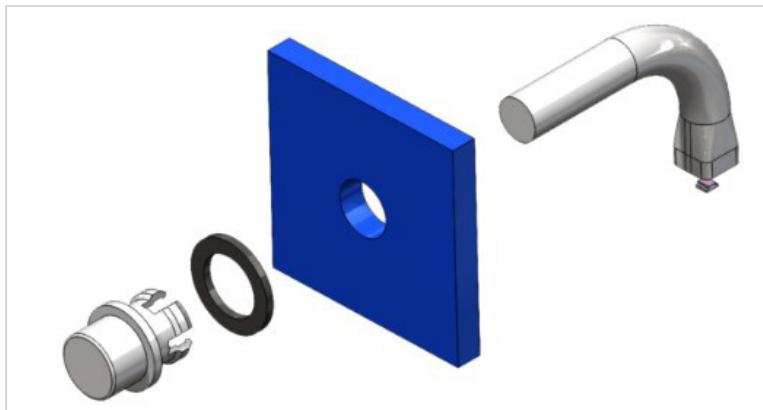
Hybrid panel-mount design combines rear mounted light pipe with a front-mounted press-fitted lens and gaskets to achieve IP68 rating.
